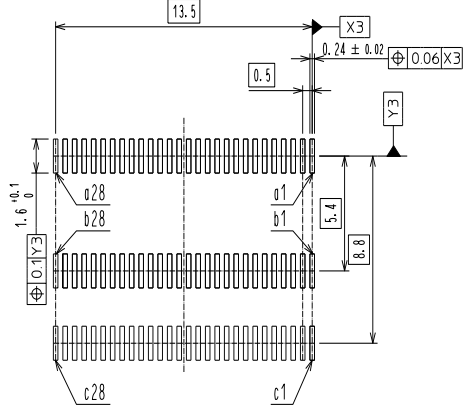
Plug Stencil Patterns (dimensions in mm)
